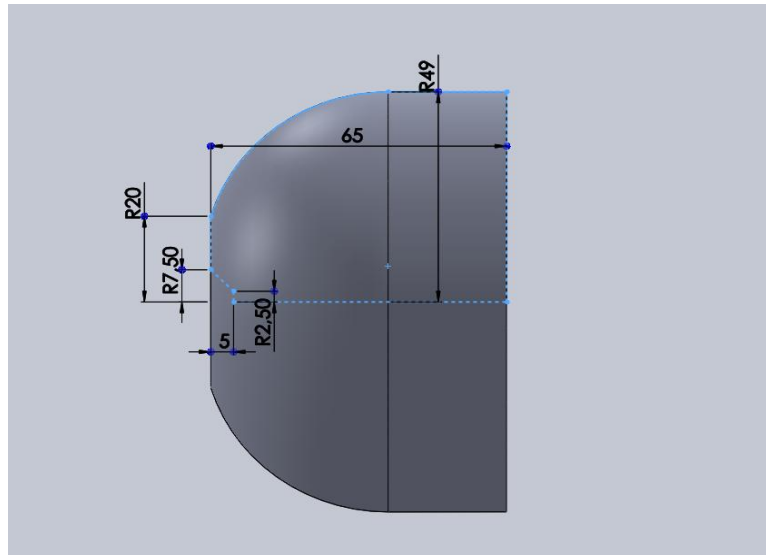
reverse air combustor dome dimensions in SOLIDWORKS.
